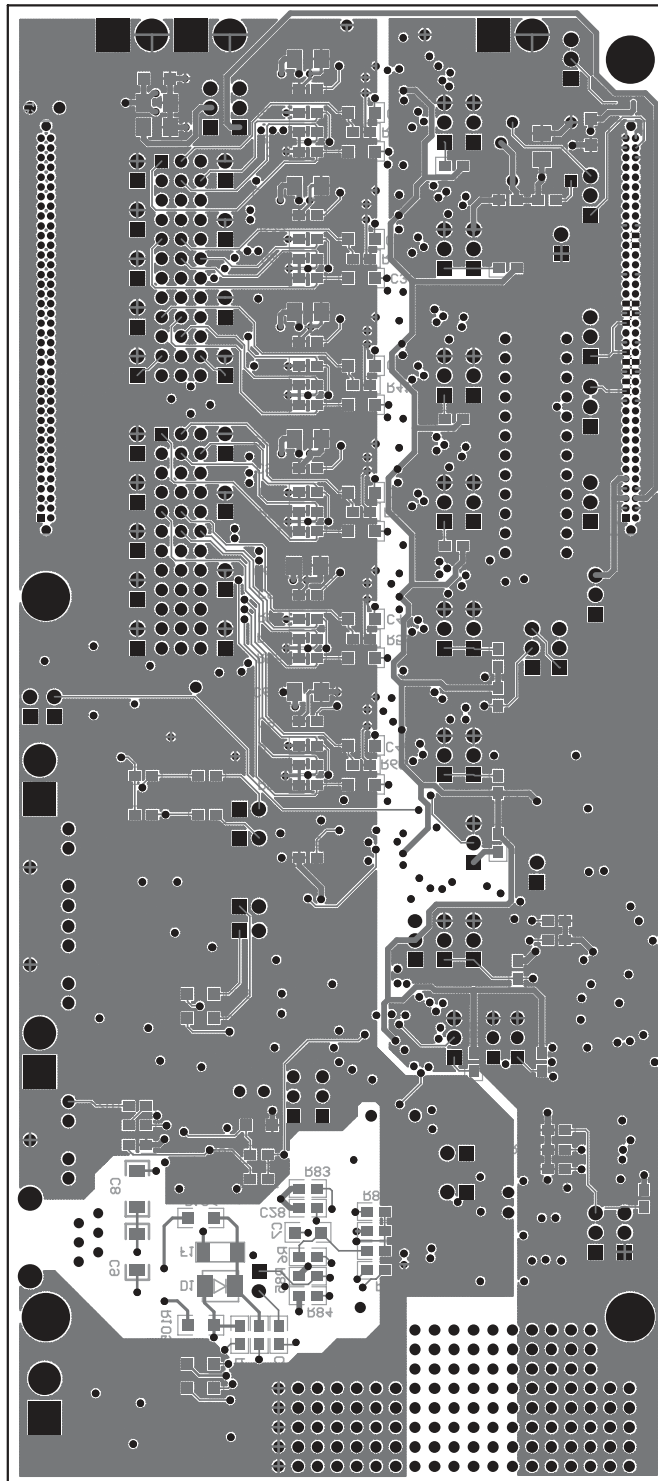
Printed-Circuit Board Layer 6 (Rev. C)
